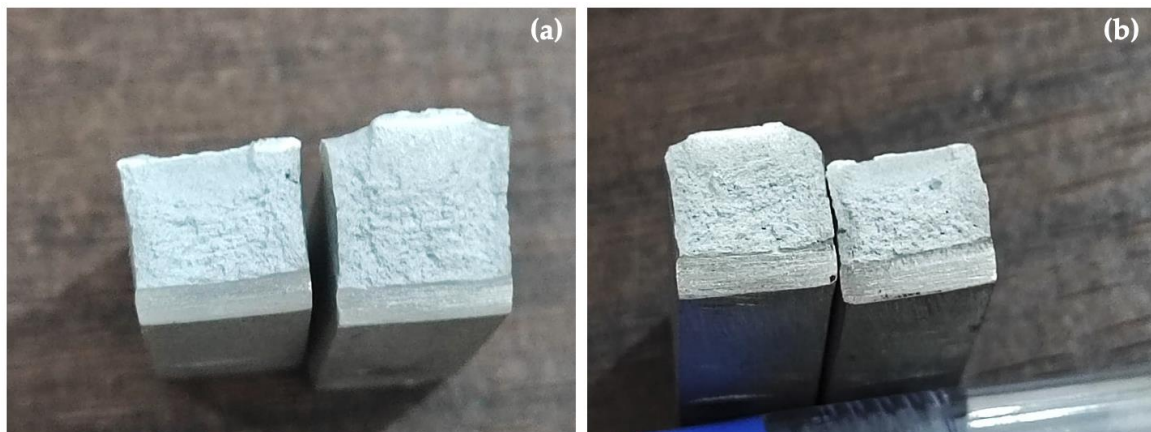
(a) Impact test fracture shape before reconditioning, (b) Impact test fracture shape after reconditioning
